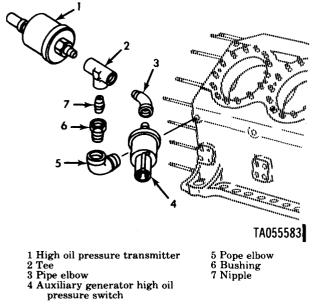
Pressure transmitter and pressure switch - exploded view, model AVDS-1790-2DR engine.
